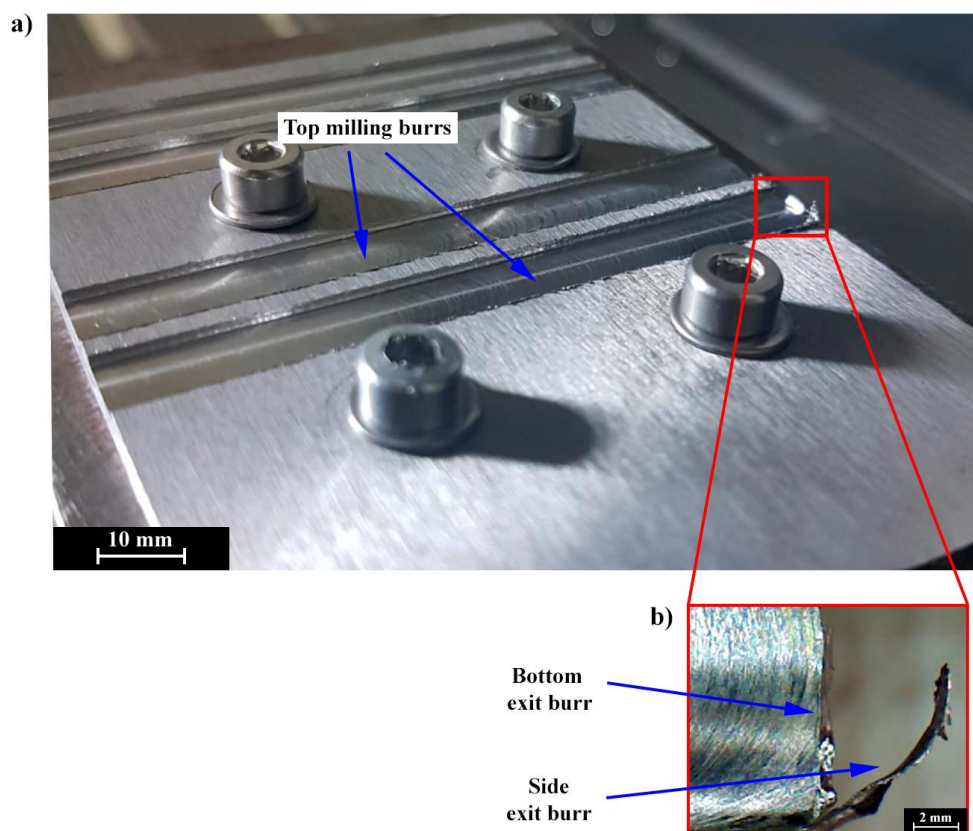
Occurrence of burrs on the machine grooves: a) Top milling burrs; b) Exit burrs
